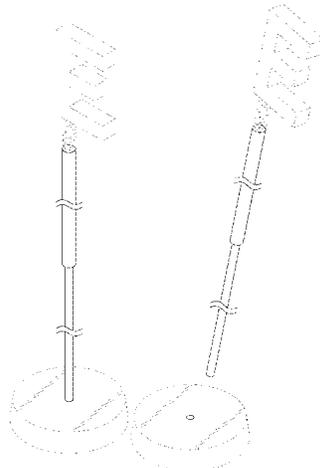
is a front view of the decoration assembly embodying my new design, according to another embodiment;
